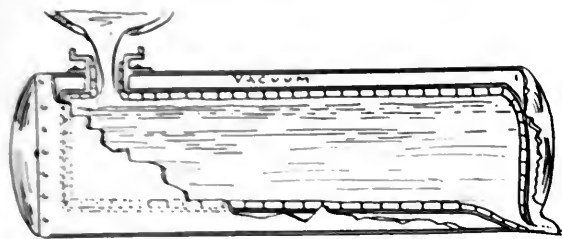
SECTIONAL VIEW OF MIXER USED BY THE FORD MOTOR CO. IN MAKING CASTINGS DIRECT FROM THE ORE
